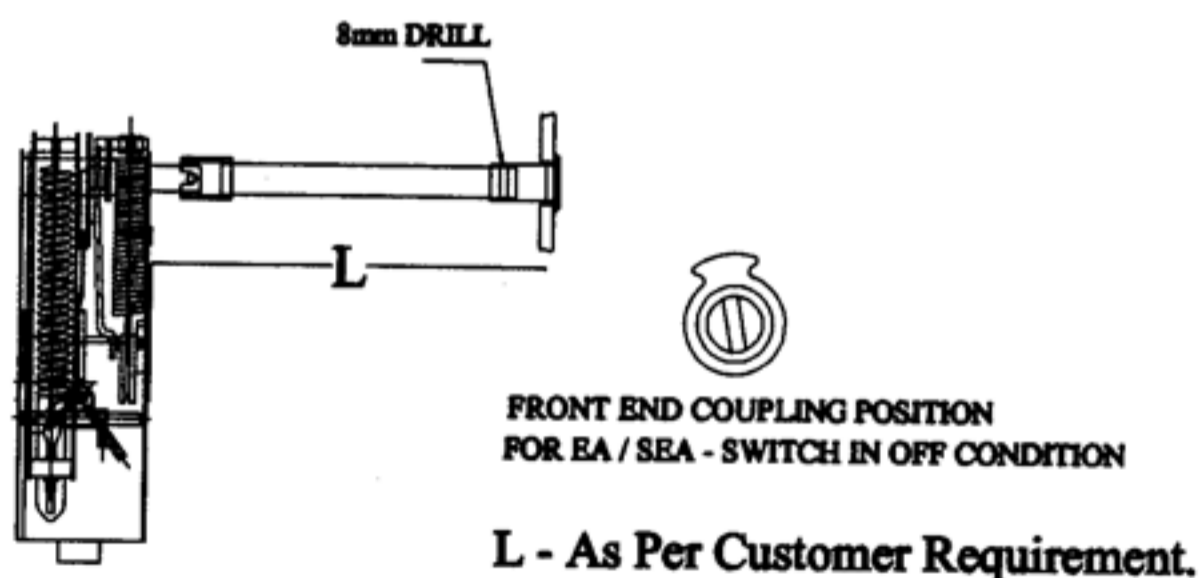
DETAILED INSTRUCTION FOR MOUNTING / INSTALLATION
